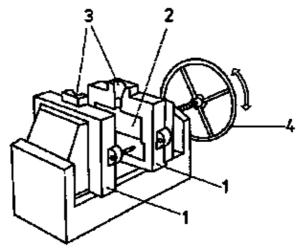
Ingot-mould casting machine (ingot mould open)
